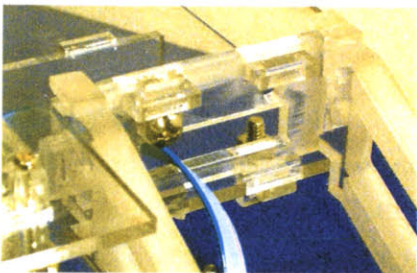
Two pieces of a robot's chassis joined at a right-angle using a tab-and-slot method
